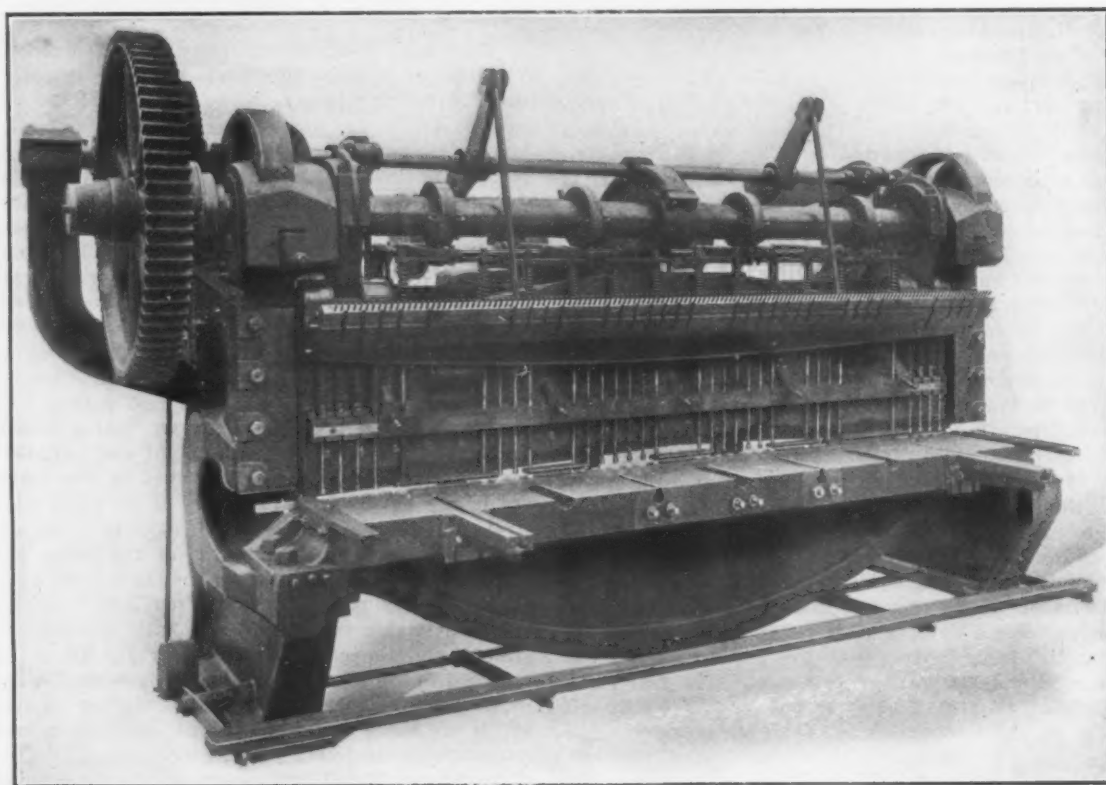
The Machine as Arranged for Shearing Without Punching.
